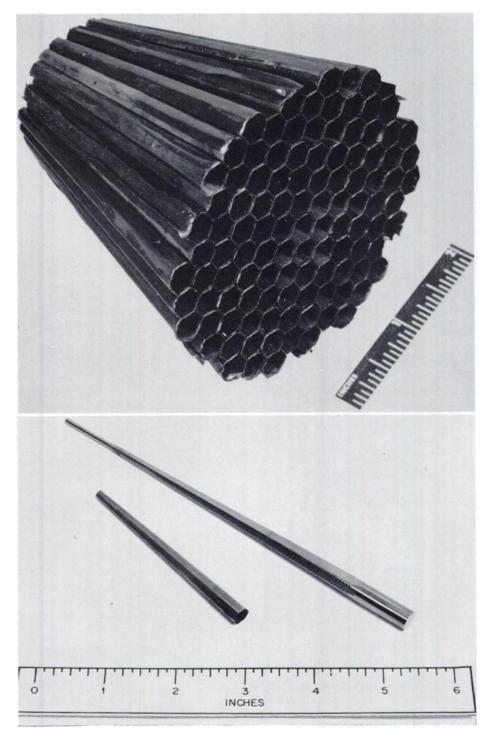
Photographs showing a single, hexagonal, tapered tube, the forming pin, and the completed collimator assembly.
